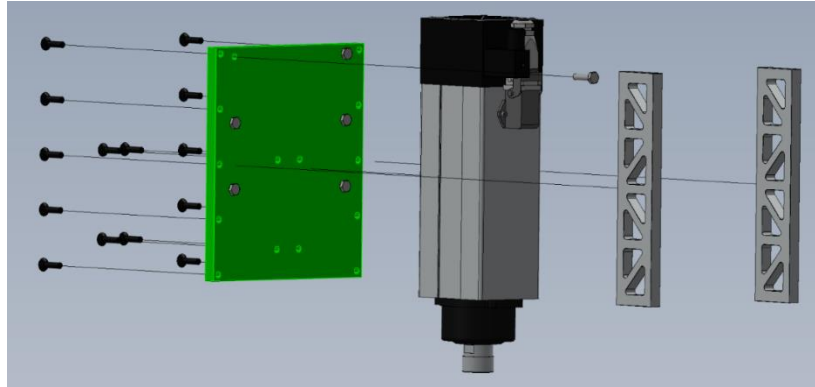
Four horsepower spindle assembly with back plate and side stiffeners
